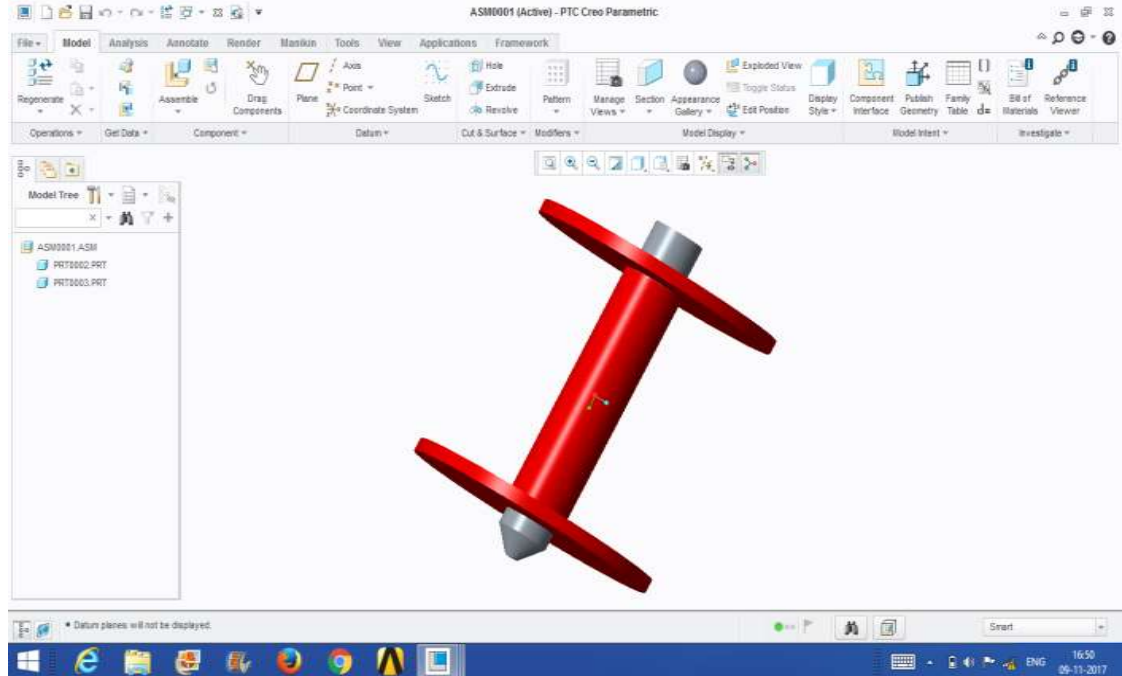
3-D design of Ball end magnetorheological finishing tool
